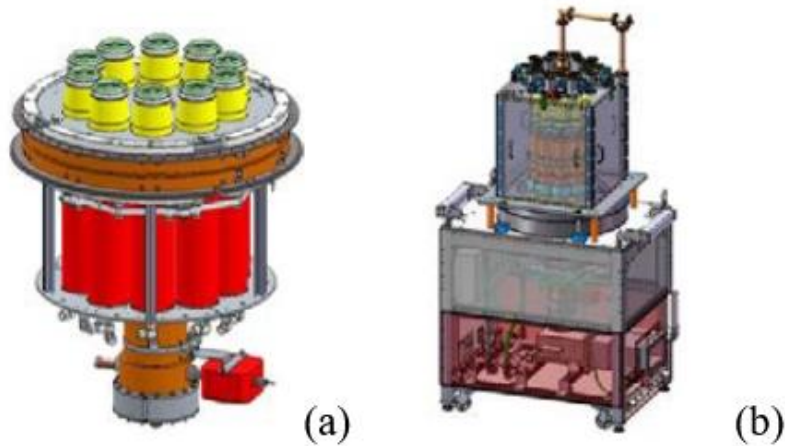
TED/CPI MB-IOT: (a) 3D models of sealed tube. (b) Main assembly.
